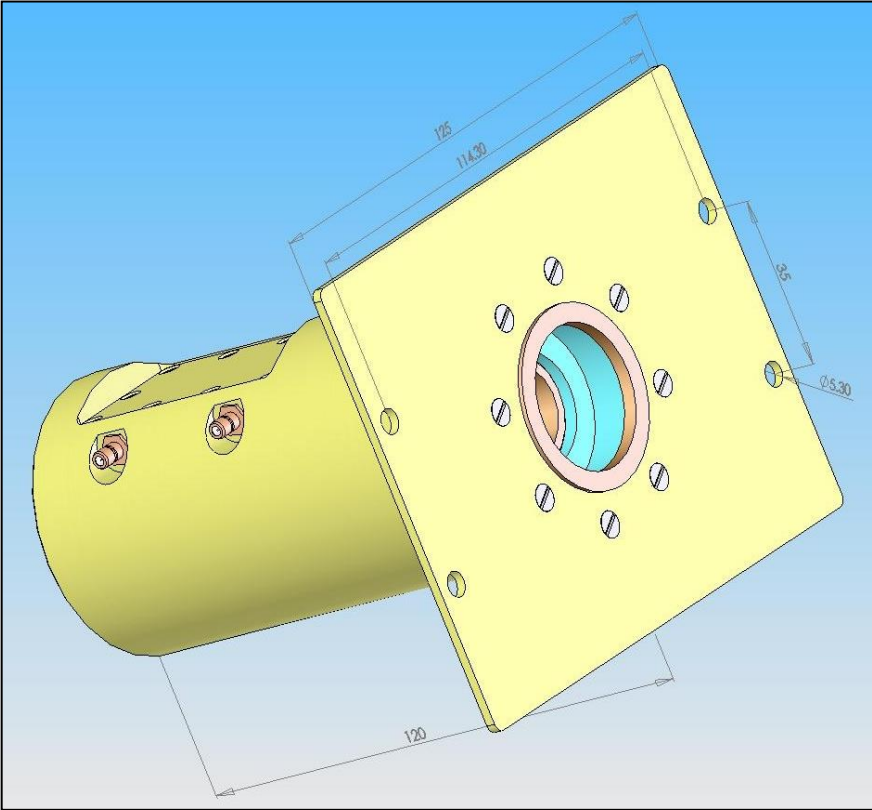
Basic CMLD dimensions. All dimensions are in millimeters. In CML, the total length is 69 mm instead of 120 mm.
